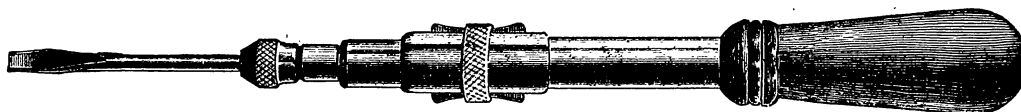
The Jones Reversible Spiral Screw Driver.
